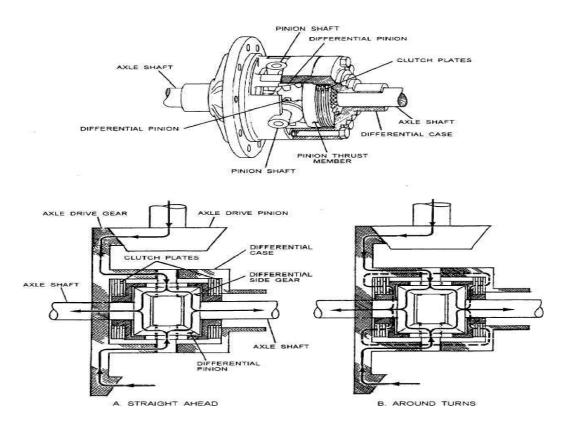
Clutch pack/ Pressure disk Limited Slip Differential A. while moving straight ahead, B. while taking turns[8]
